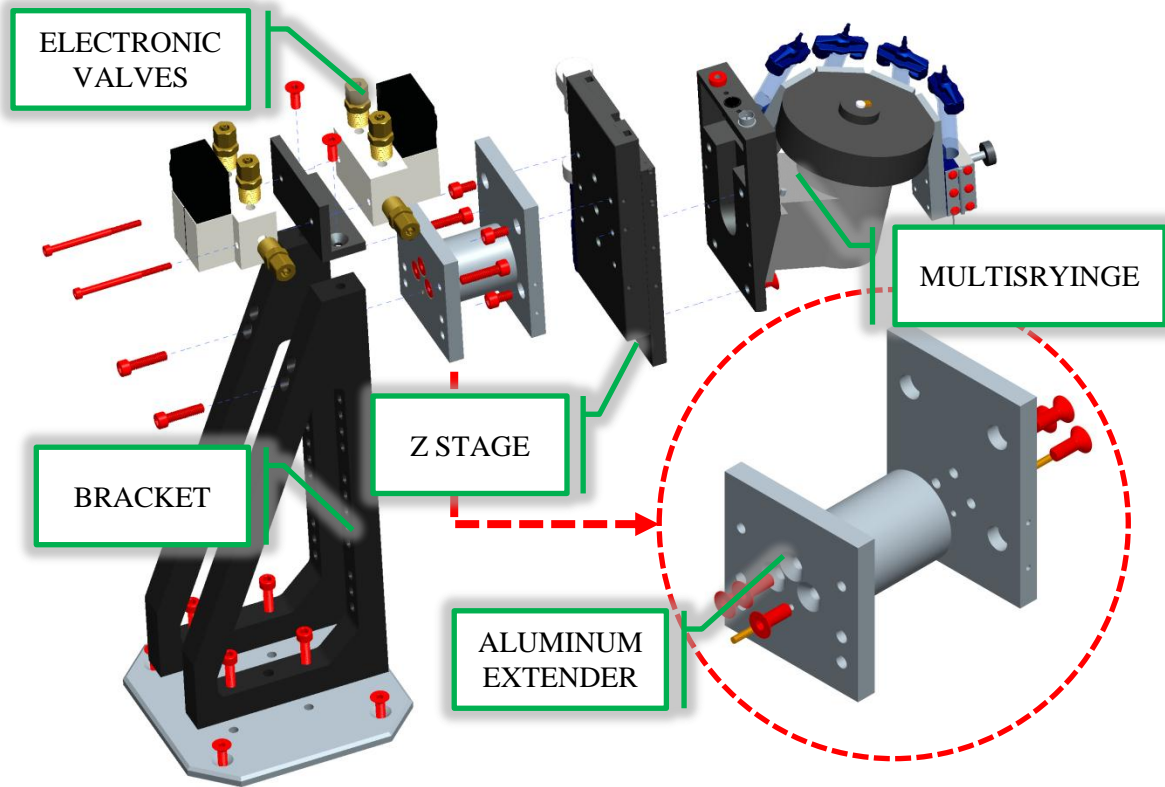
Exploded View of Toolbit Mount Subassembly
